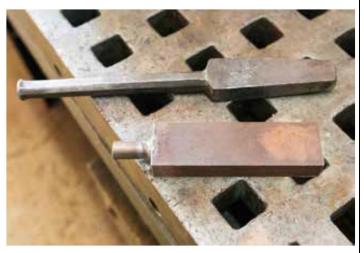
A finished drift and a piece of flat bar stock for making another. Note that the bar stock has a short piece of 1 inch round stock welded on to make it easier to handle the flat bar during forging. The extension can be cut off when no longer needed.
